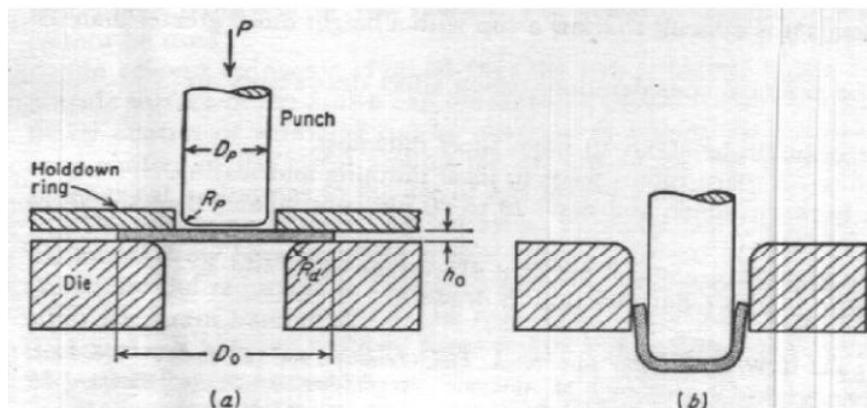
Deep Drawing of a cylindrical cup (a) before drawing (b) after drawing [2]
